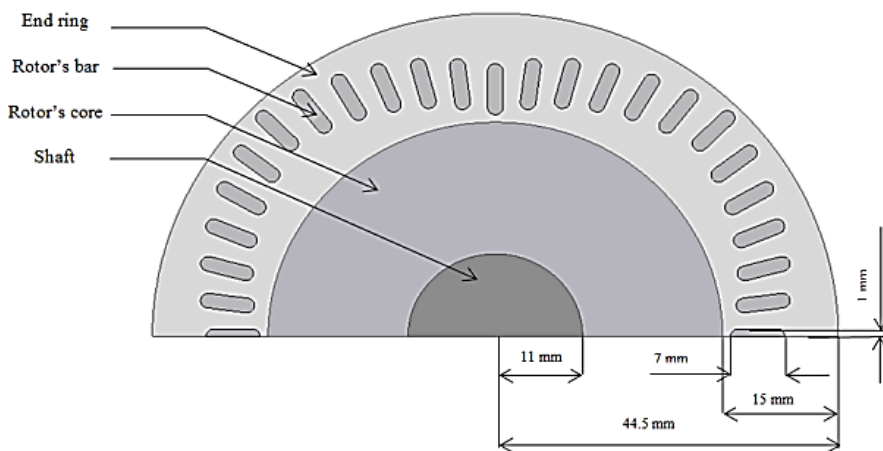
The cross-sectional of the proposed design of the squirrel cage rotor
